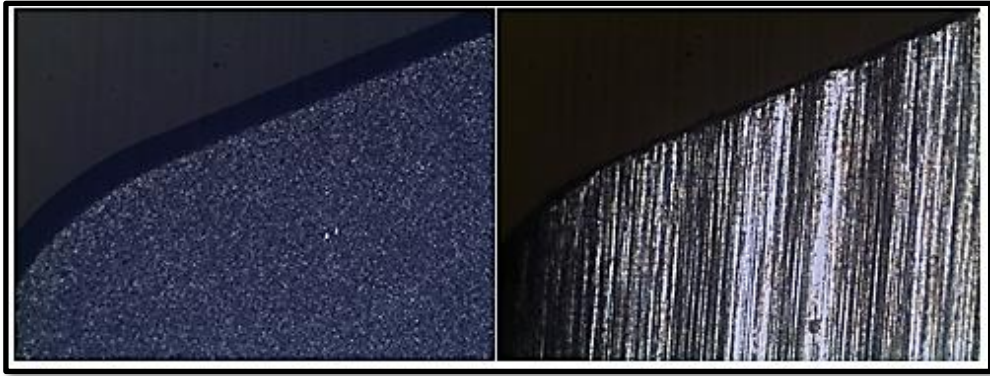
Rake surface of carbide insert before (left – smooth surface) and after (right – rough surface) being textured via grinding process
